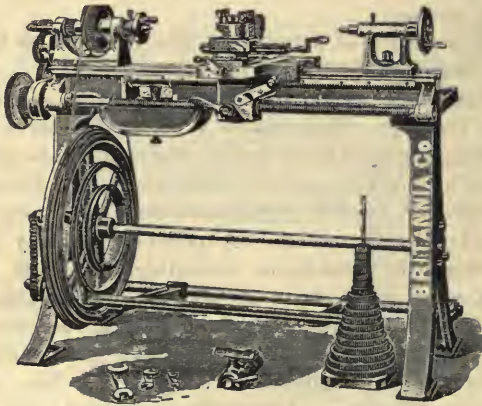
SCREW-CUTTING LATHE, 4IN. TO 5IN. CENTRES.
